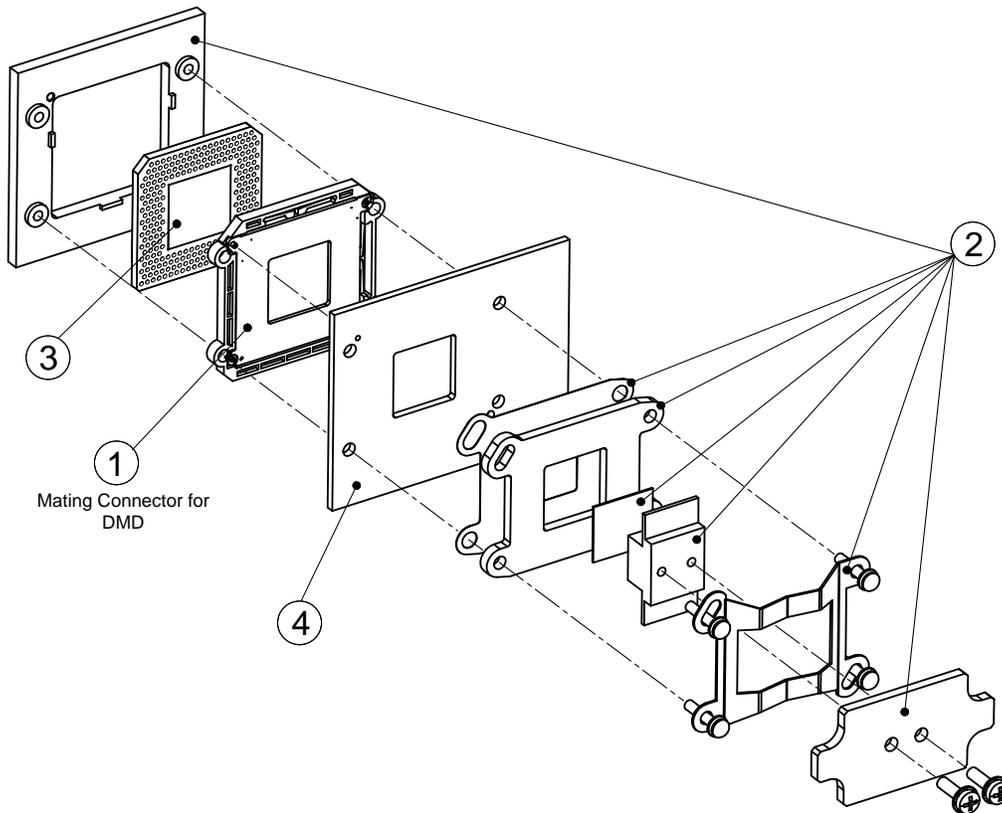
Exploded View of Mounting Concept for .9” Size Ceramic Type-A
